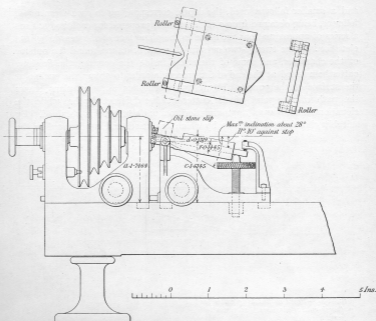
Rocher sharpening appliance for the cutters used on the punch-cutting machine.
